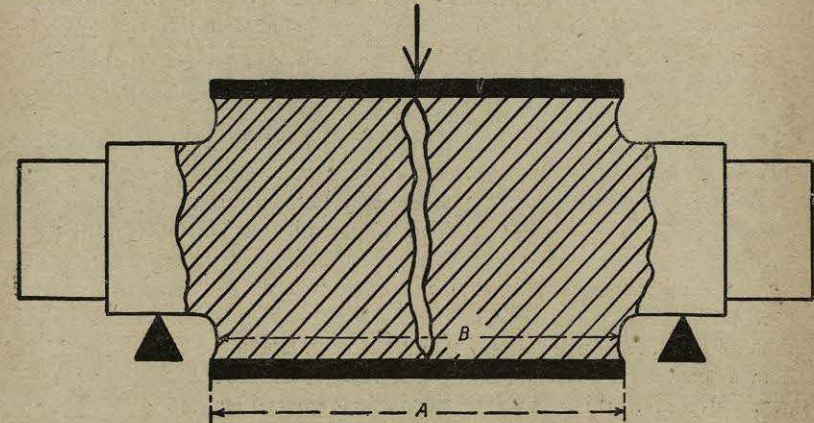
Sheet Mill Roll Diagram to explain Method of Fracture.
